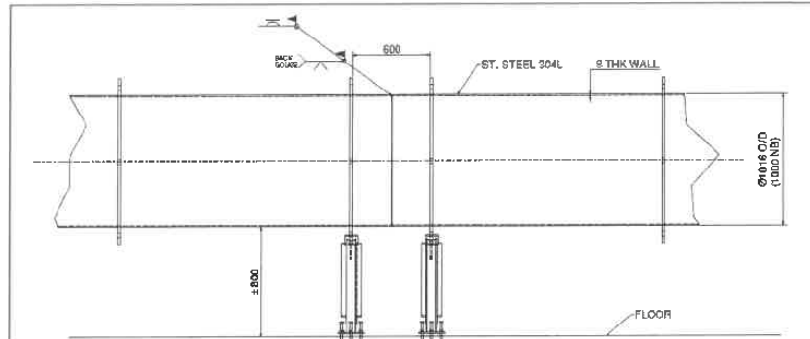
Typical welding arrangement for a 1000 NB pipe site weld
